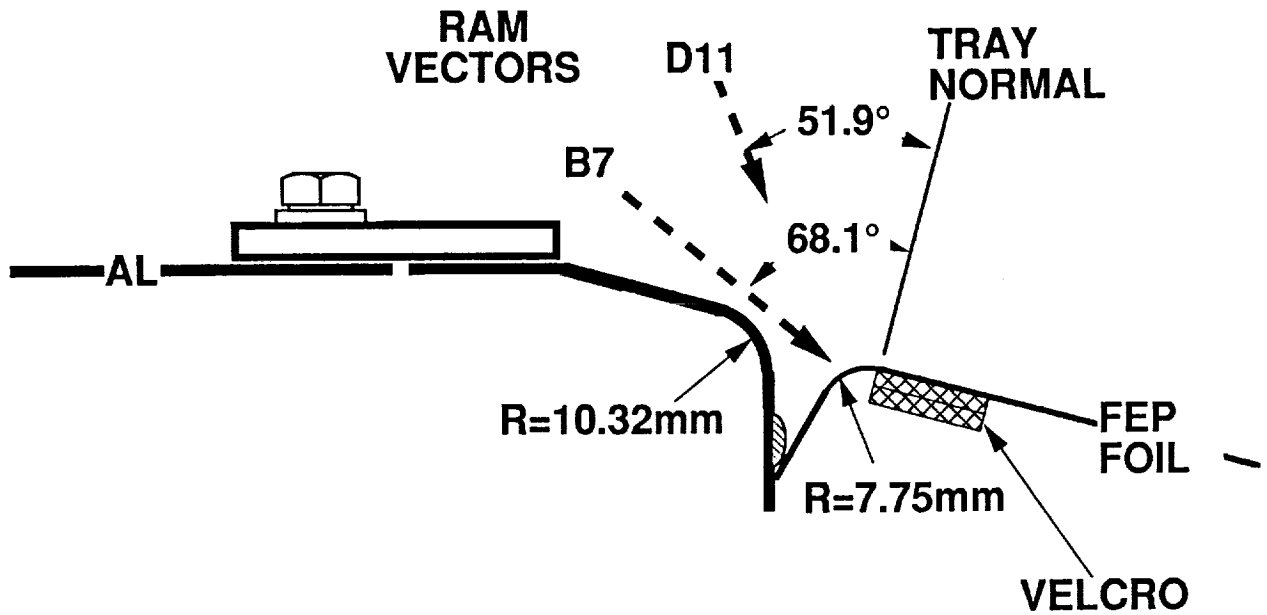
Shape of the edge attachment holding the thermal control blanket, Experiment Trays B7 and D11.
